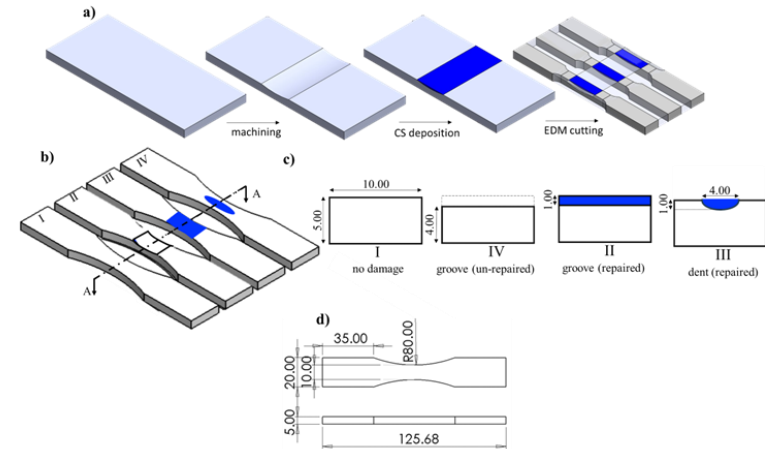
Sample preparation process, including the machining of a plate to introduce the artificial damage, the cold spray deposition process, and extraction of dog-bone specimens. (b) Different specimen types (from Left): wrought (undamaged), groove (damaged), groove (repaired), and dent (repaired). (c) Cross-sectional view of section A-A. (d) Fatigue test specimens.
